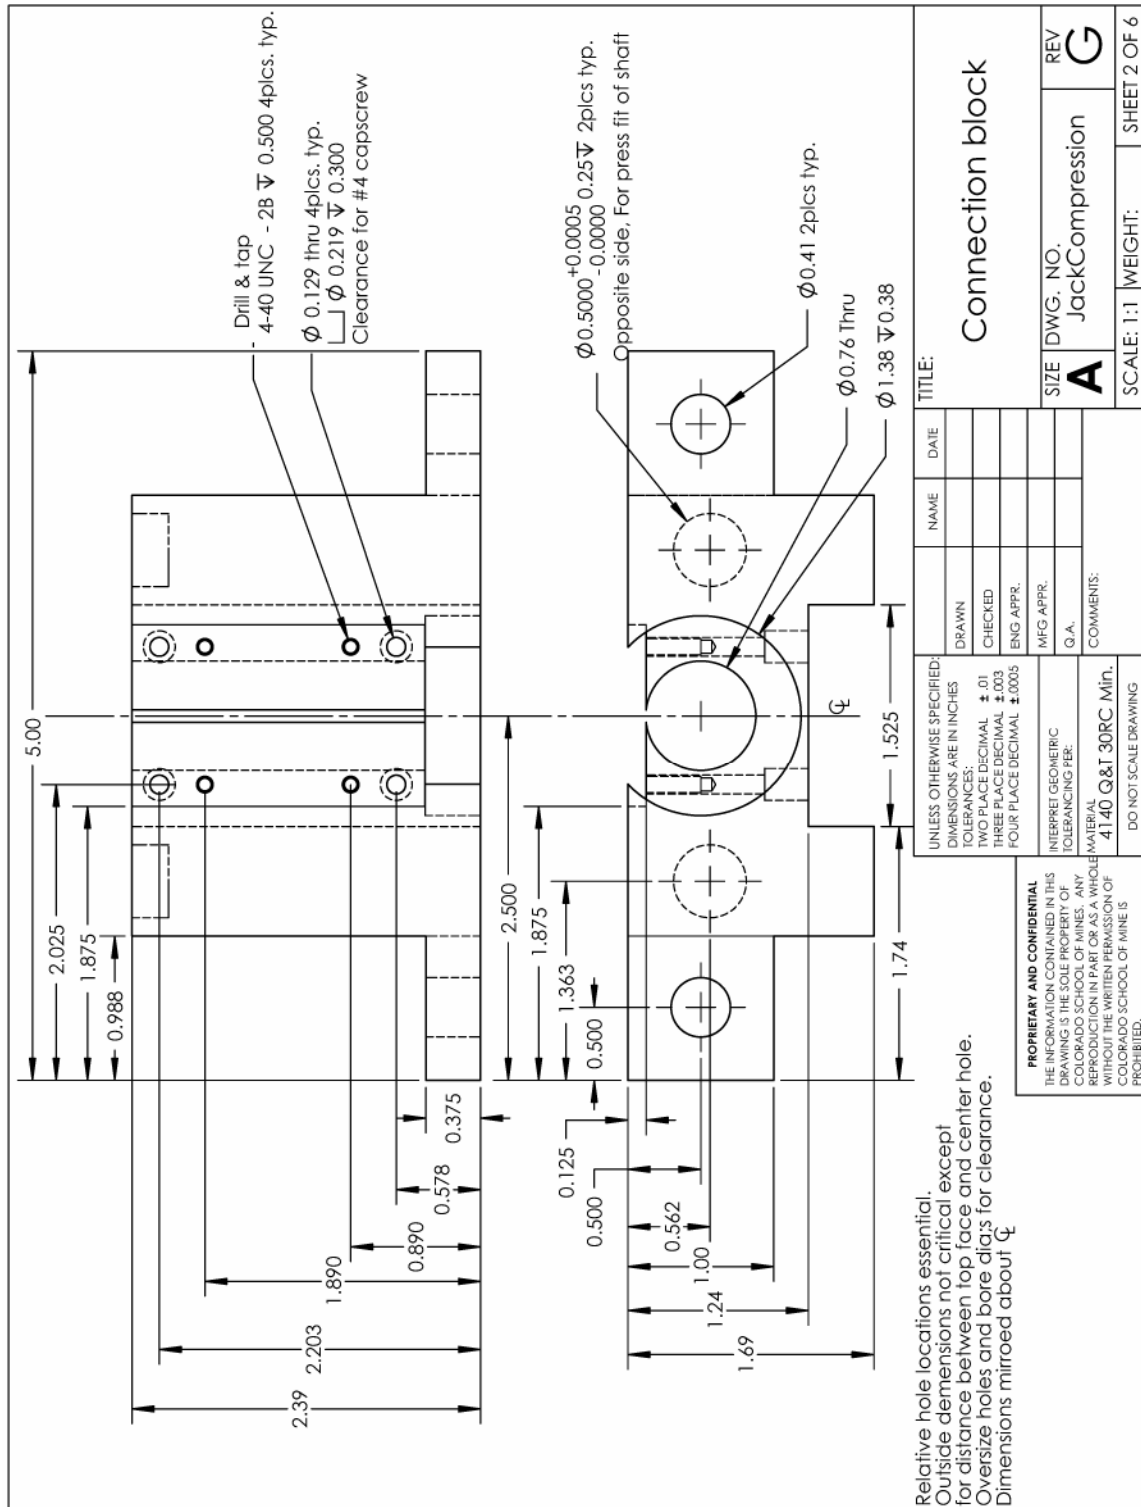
Shop drawing of connection block, connecting jackscrew to linear guide rails and containing one of the grips.
